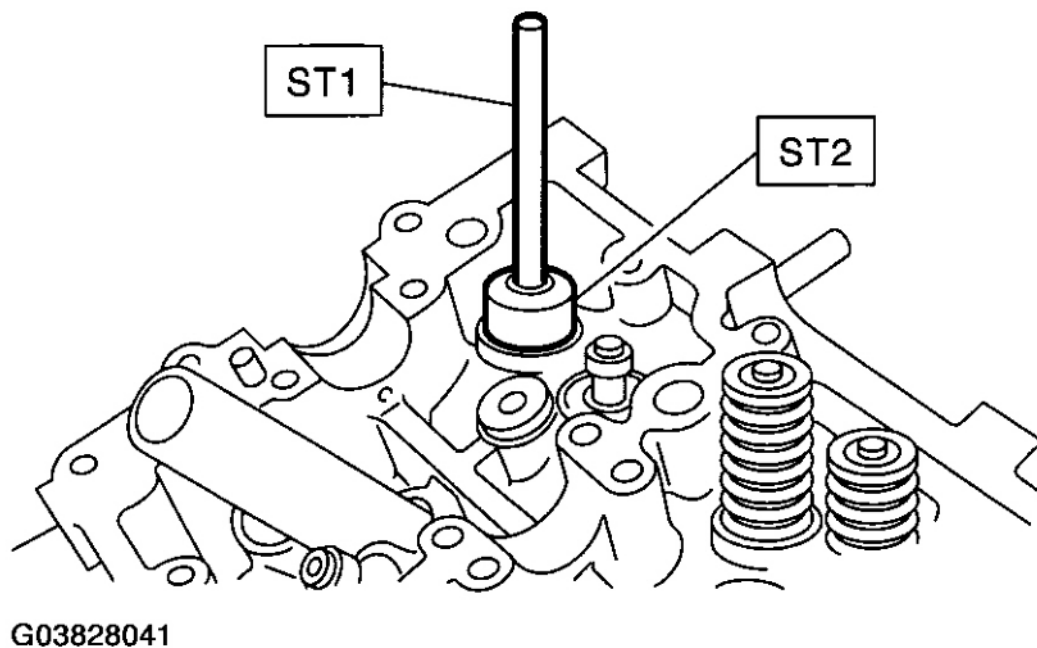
Installing ST1 499767200 Valve Guide Remover
